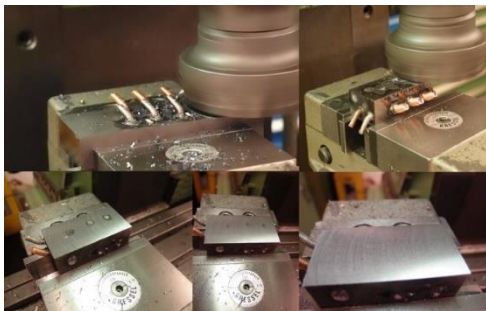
Milled surfaces to investigate the welding penetration in the parent material.
